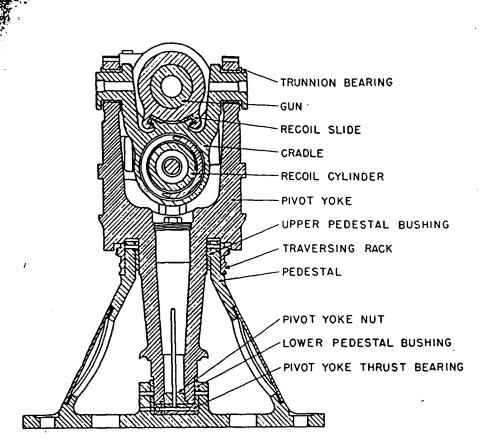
3-inch gun barbette carriage M1903, pedestal type, sectional schematic drawing.
